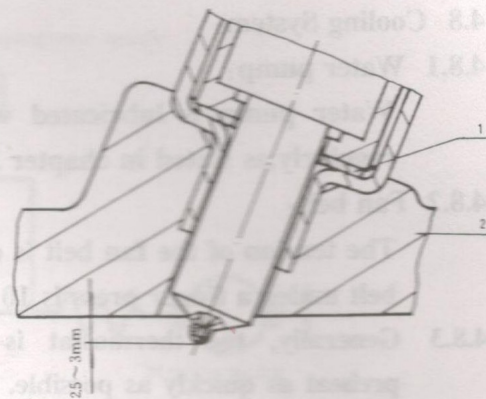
Projection of Nozzle Tip beyond Cylinder Head Bottom Face
